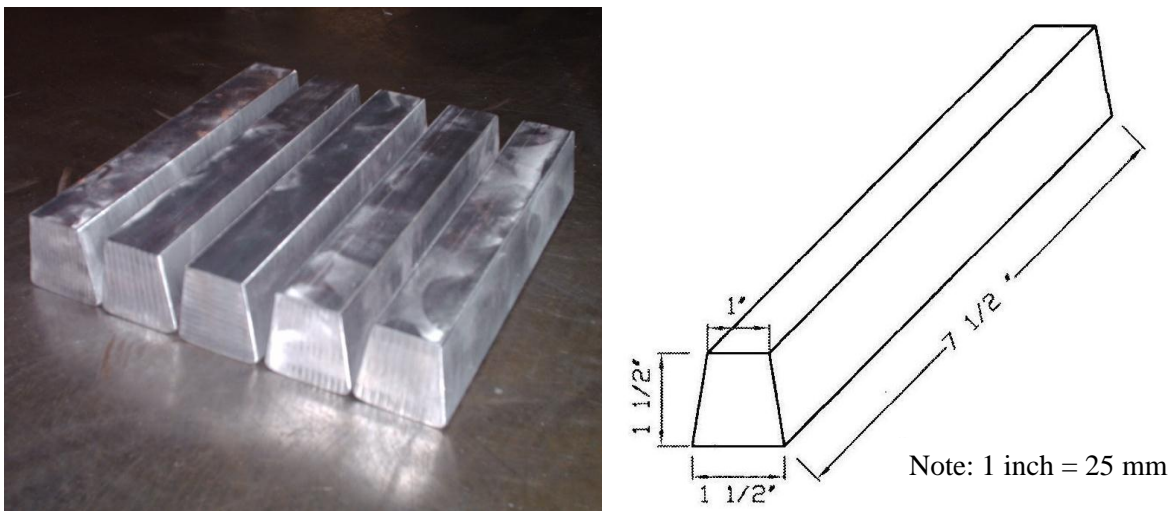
Shear Lugs Shape (Left) and Dimensions (Right)
